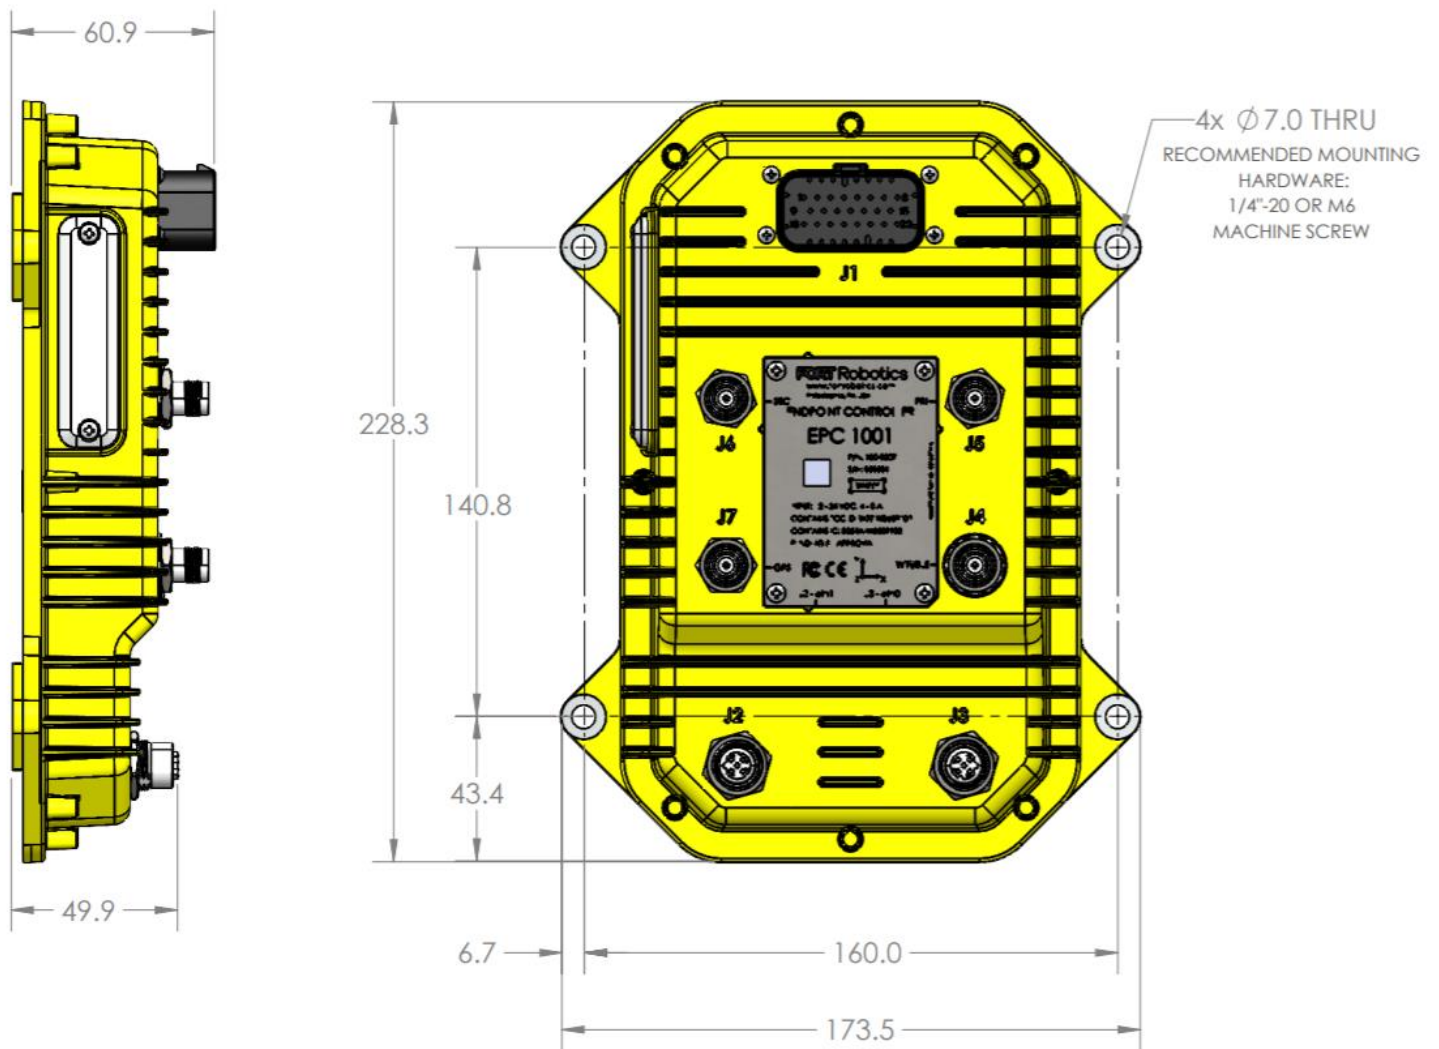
EPC 1001 Mechanical Drawing (all dimensions in mm)
